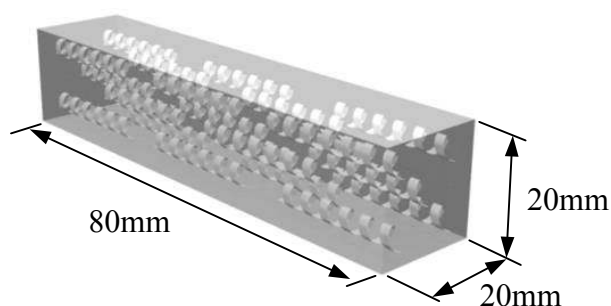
A schematic illustration showing machining chips reinforced composite material.
